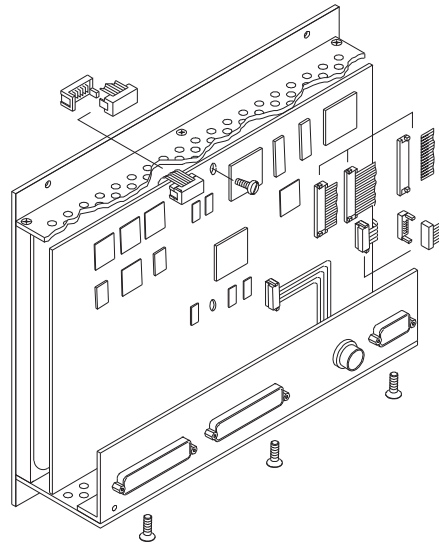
Unscrew and removal of main pcb and connector panel
